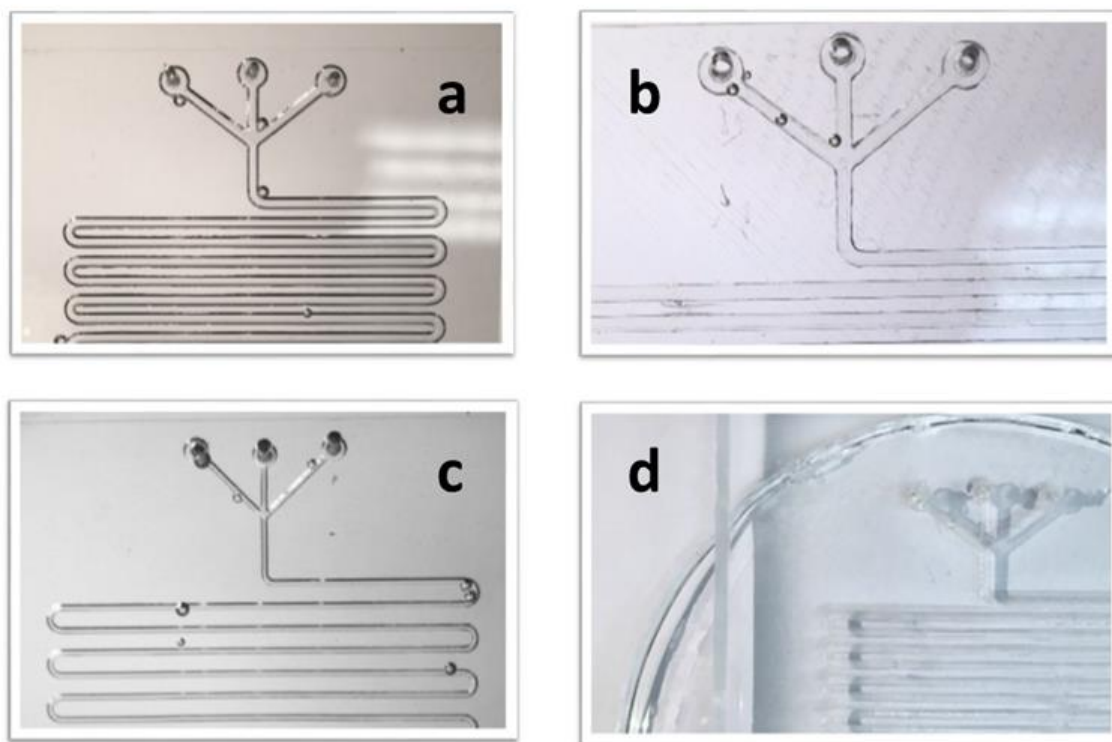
3D printed moulds: A) HR 3D printer OC350 mould (1.0 mm × 1.0 mm); B) OC350 mould (250 μm × 250 μm); C) desktop 3D printer U2+ (1.0 mm × 1.0 mm).
